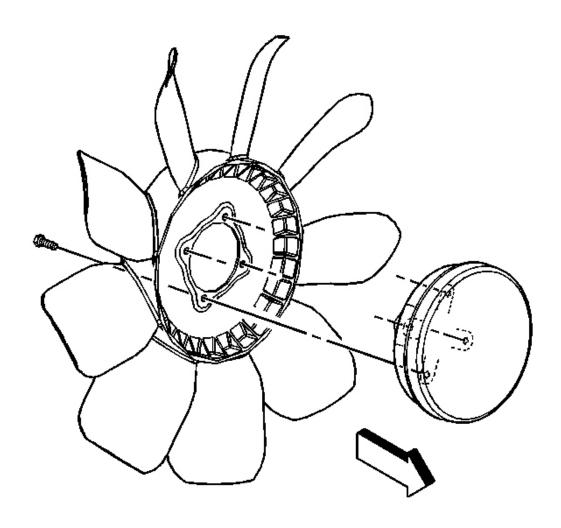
View Of Fan Blade & Fan Clutch Courtesy of GENERAL MOTORS CORP.
